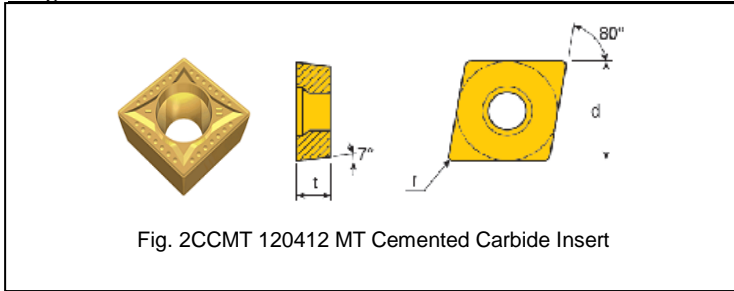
CCMT 120412 MT Cemented Carbide Insert
